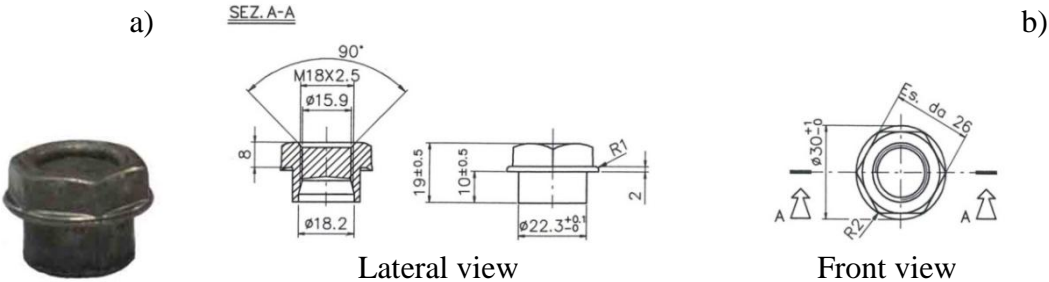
a) AISI 1005 hex-head plug fitting and b) front and top views. All dimension are in mm.
